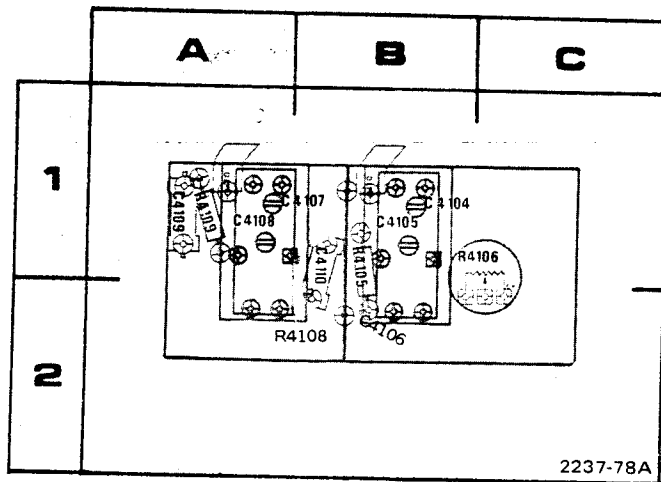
A3 Cam Switching board (bottom) component locations.
